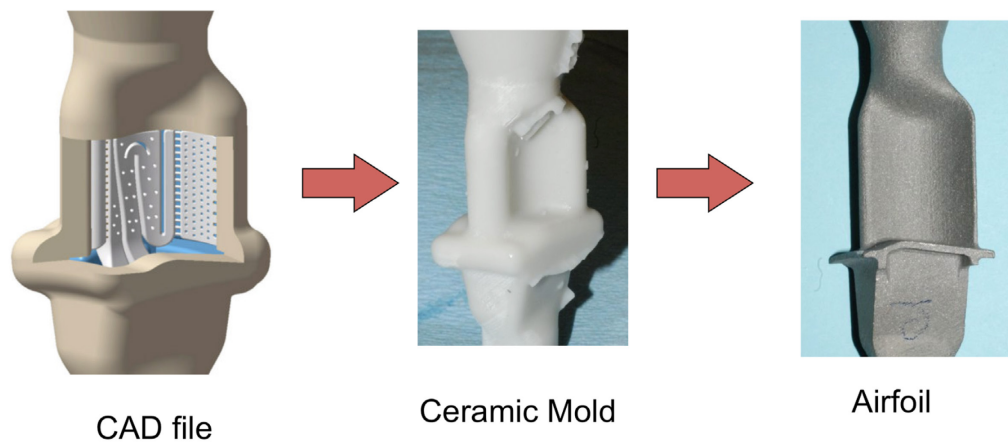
Images showing part at different stages: CAD file, ceramic mold, and airfoil (pre-machining).
